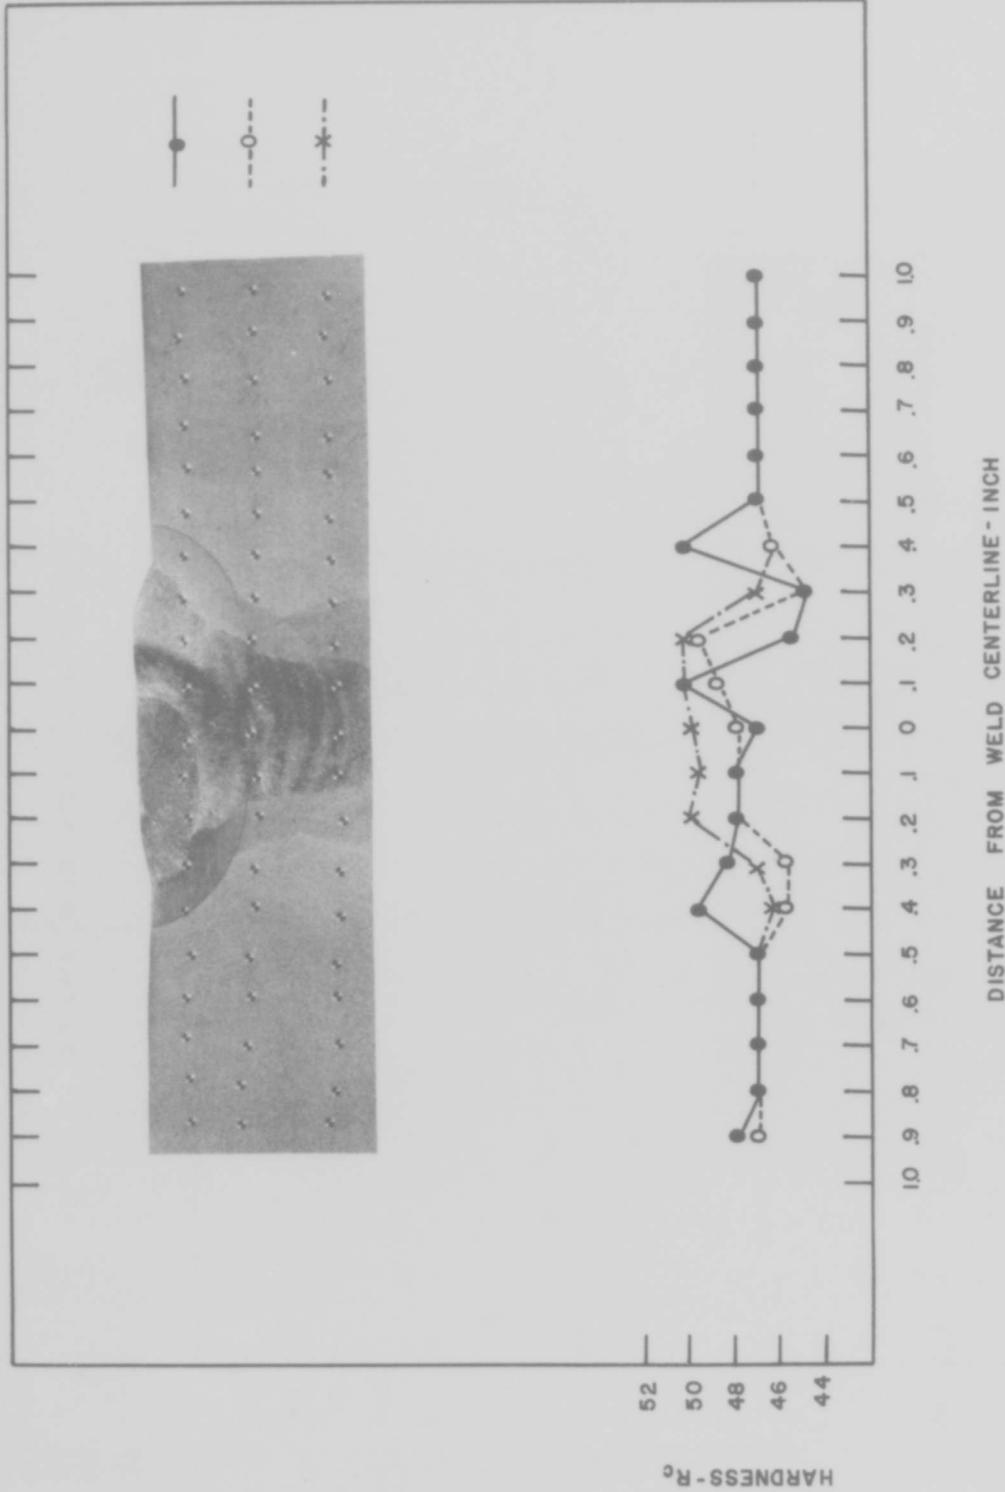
Hardness Survey of TIG Weld H249 Made in HP 9-4-20 Plate Using Filler Wire No. 13 (HP 9-4-20 Modified with 0.20%Ti).
